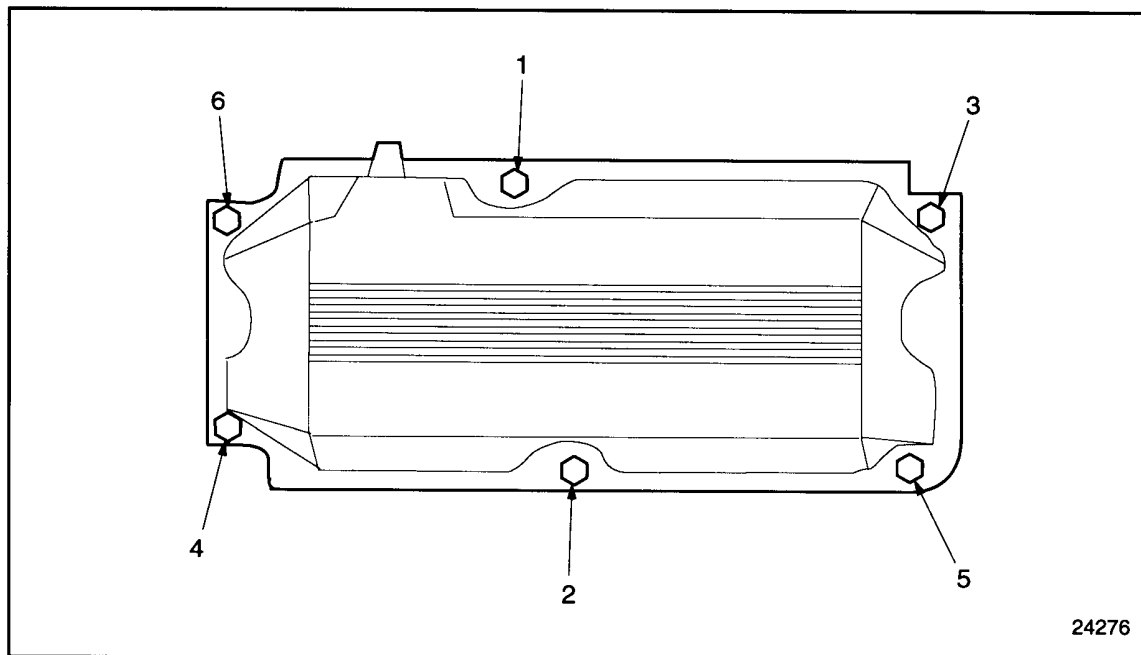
Rocker Cover Bolt Cap Tightening Sequence
